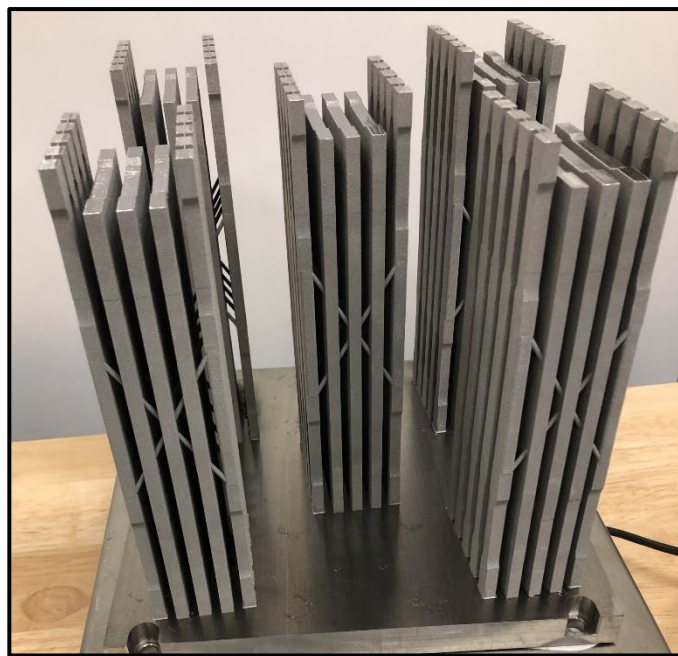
A photograph of a completed print still attached to the build plate.
